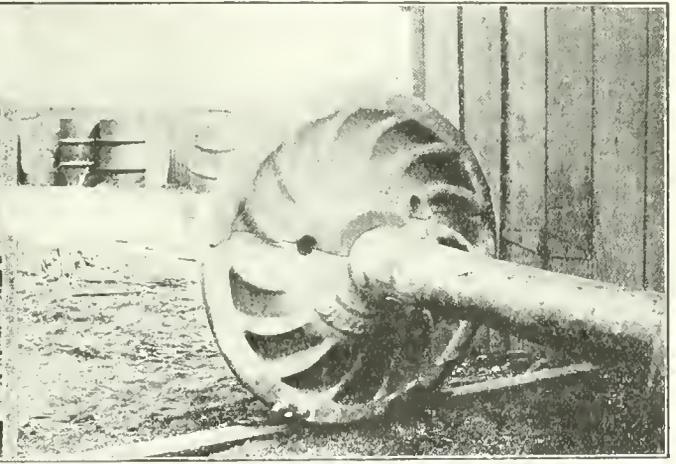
REAR VIEW OF BROKEN WHEEL, SHOWING RADIAL LINES OF RUPTURE PASSING THROUGH CORE LEG OPENINGS OF REAR PLATE. INITIAL POINT OF RUPTURE BELIEVED TO BE AT THE RIM ON LEFT SIDE
